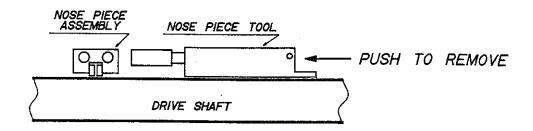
REMOVING THE NOSE PIECE ASSEMBLY
